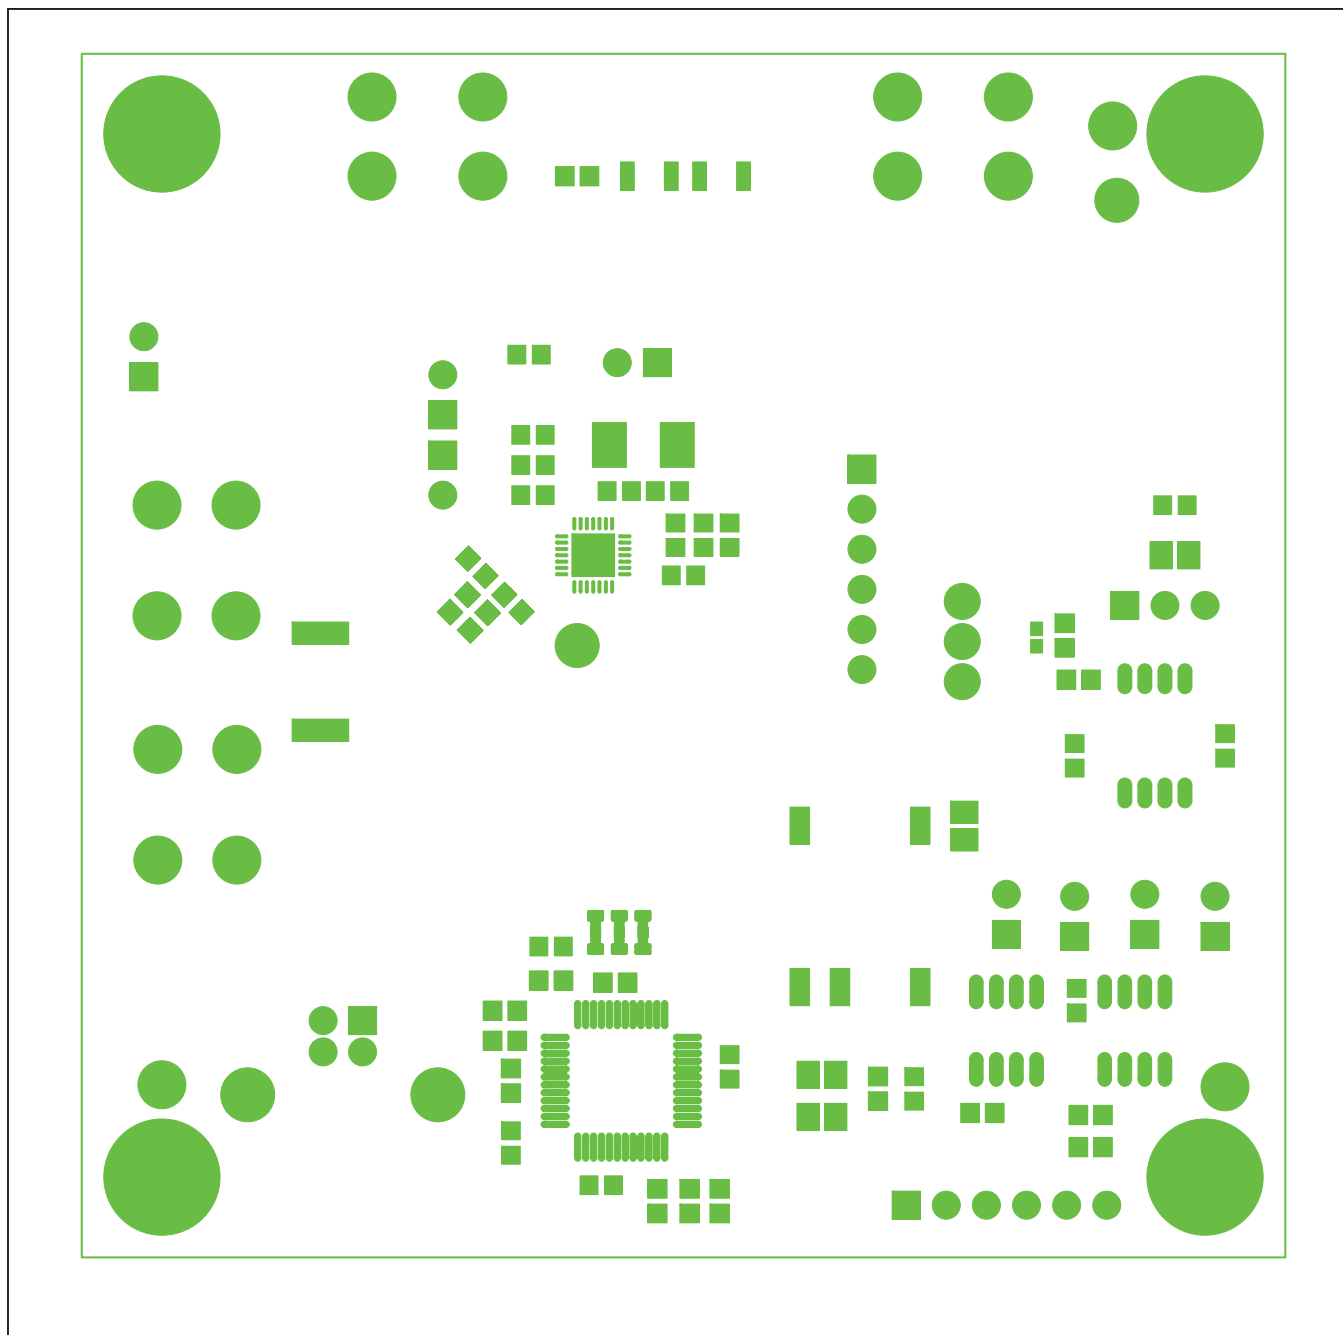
MAX71020A EV Board Layout—Top Soldermask
